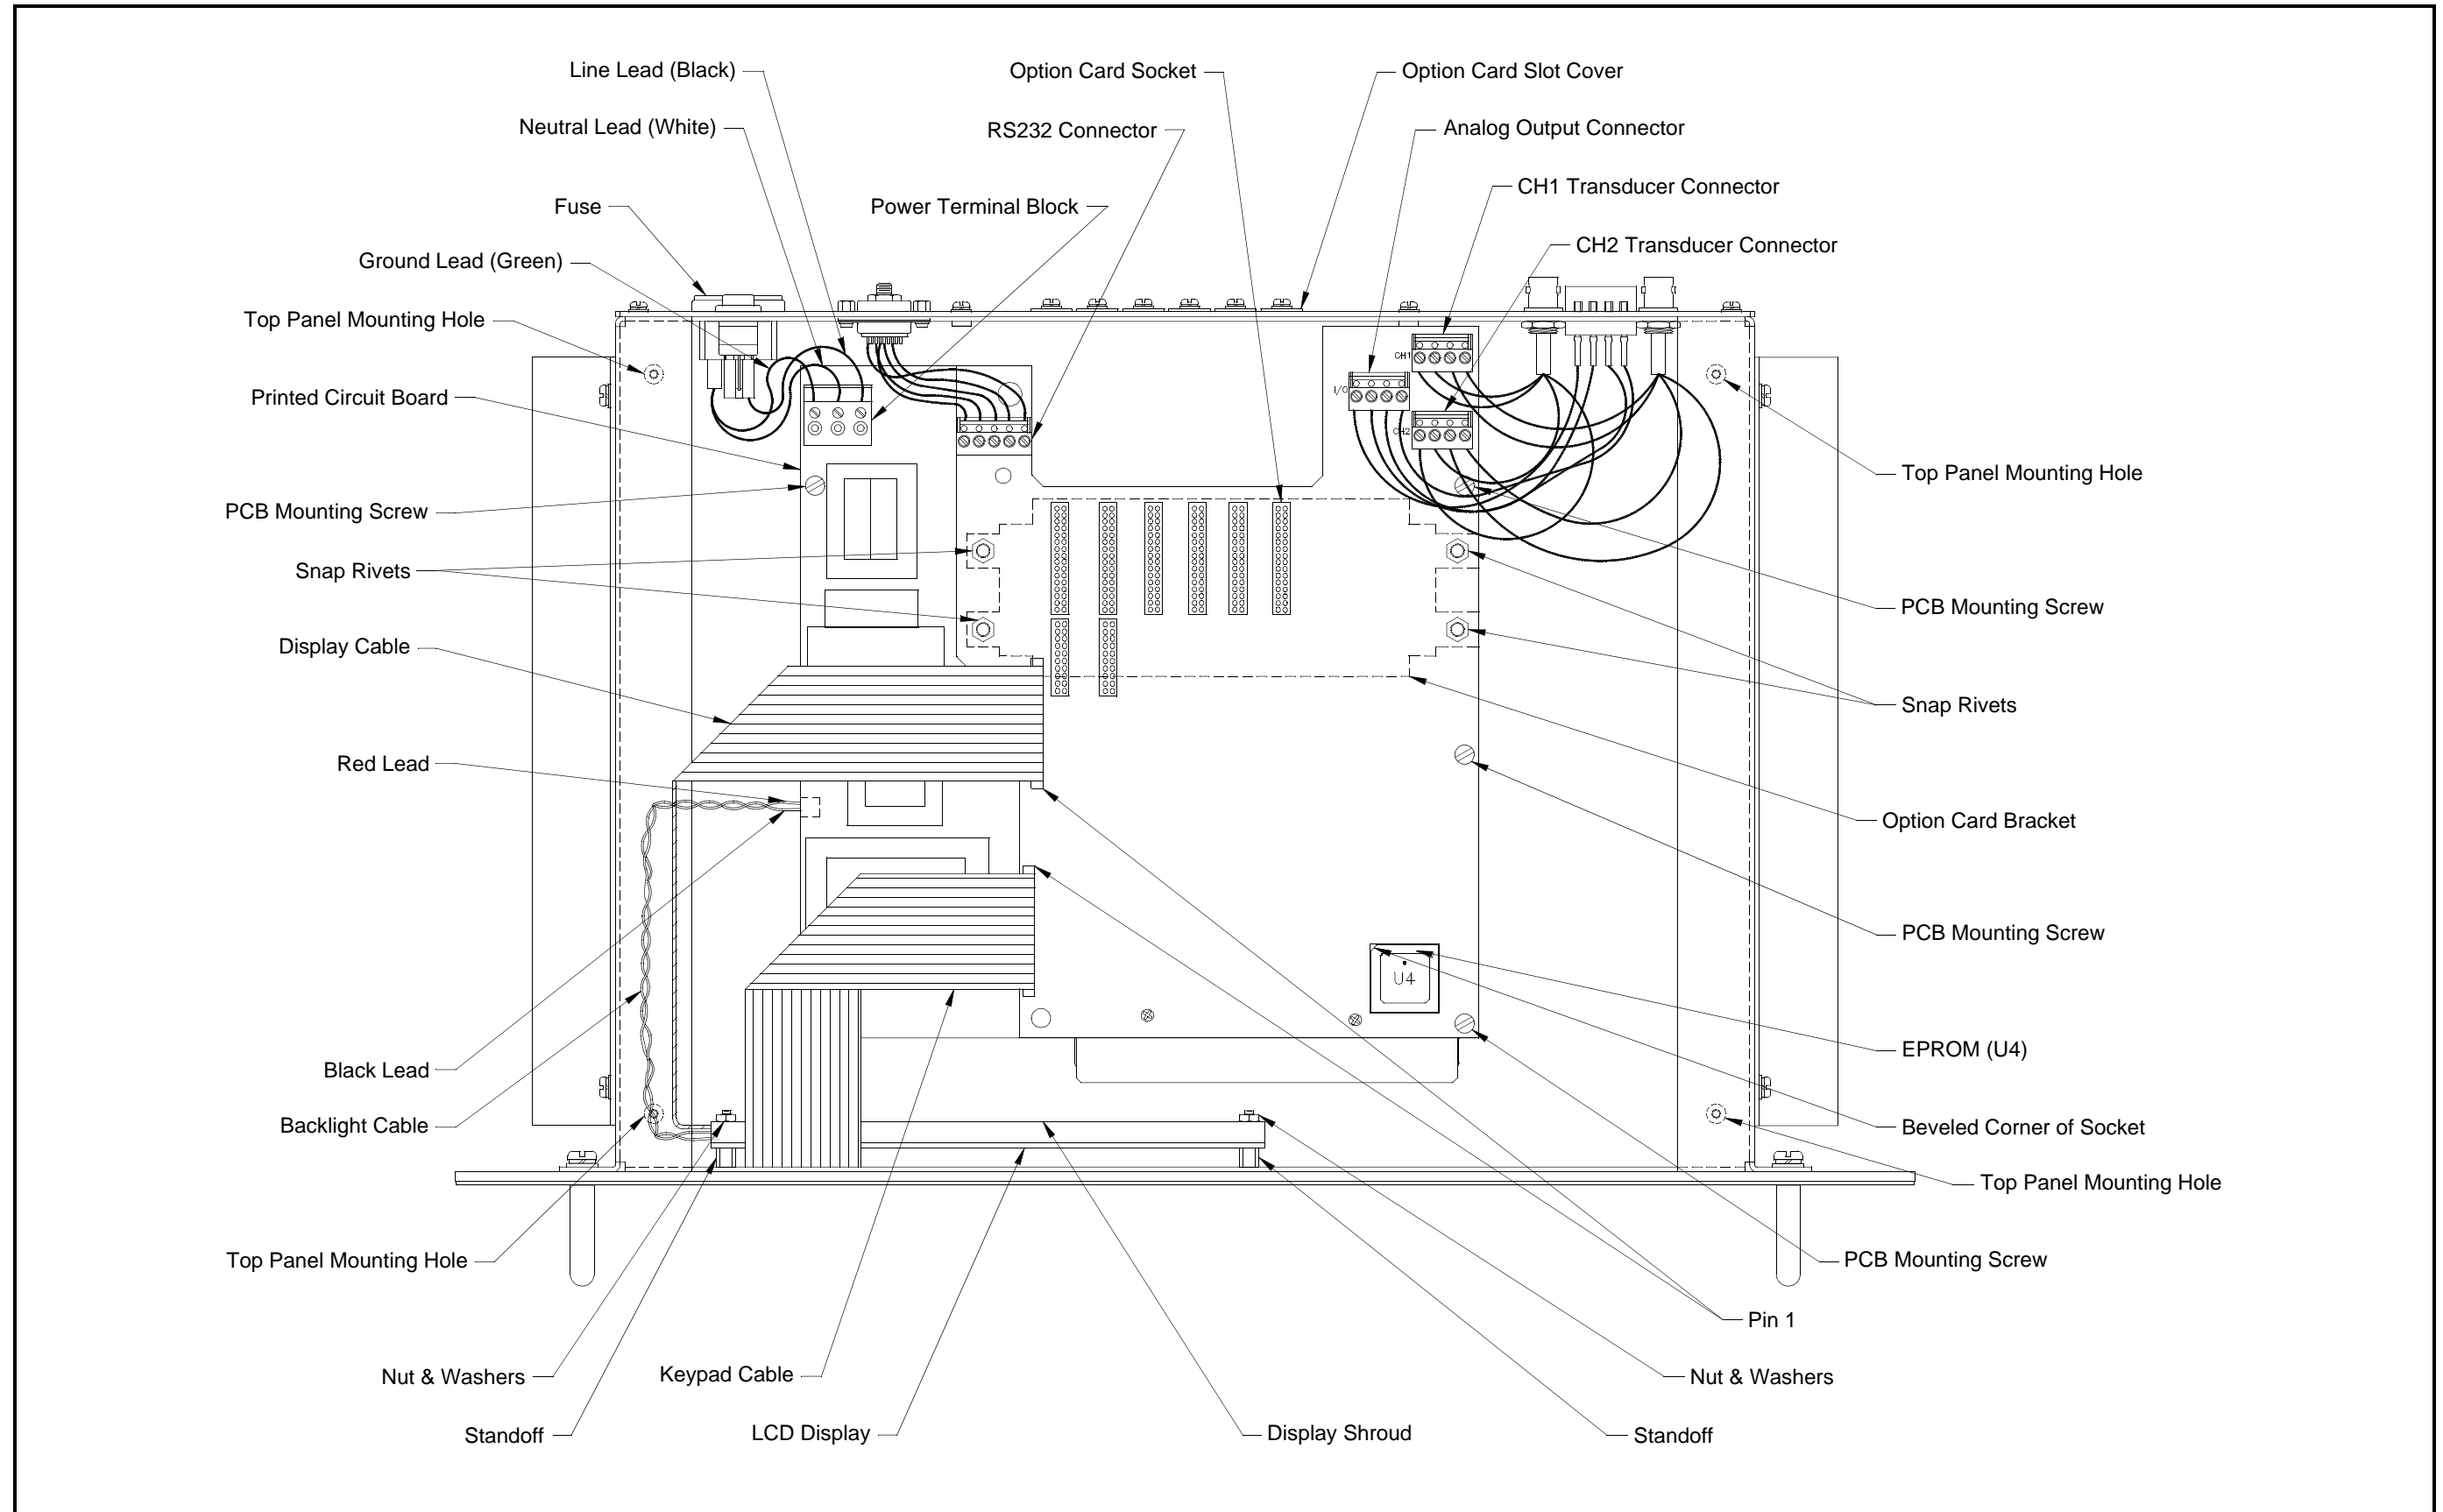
Model DF868 Rack Mount Console Assembly - Drawing #705-849
